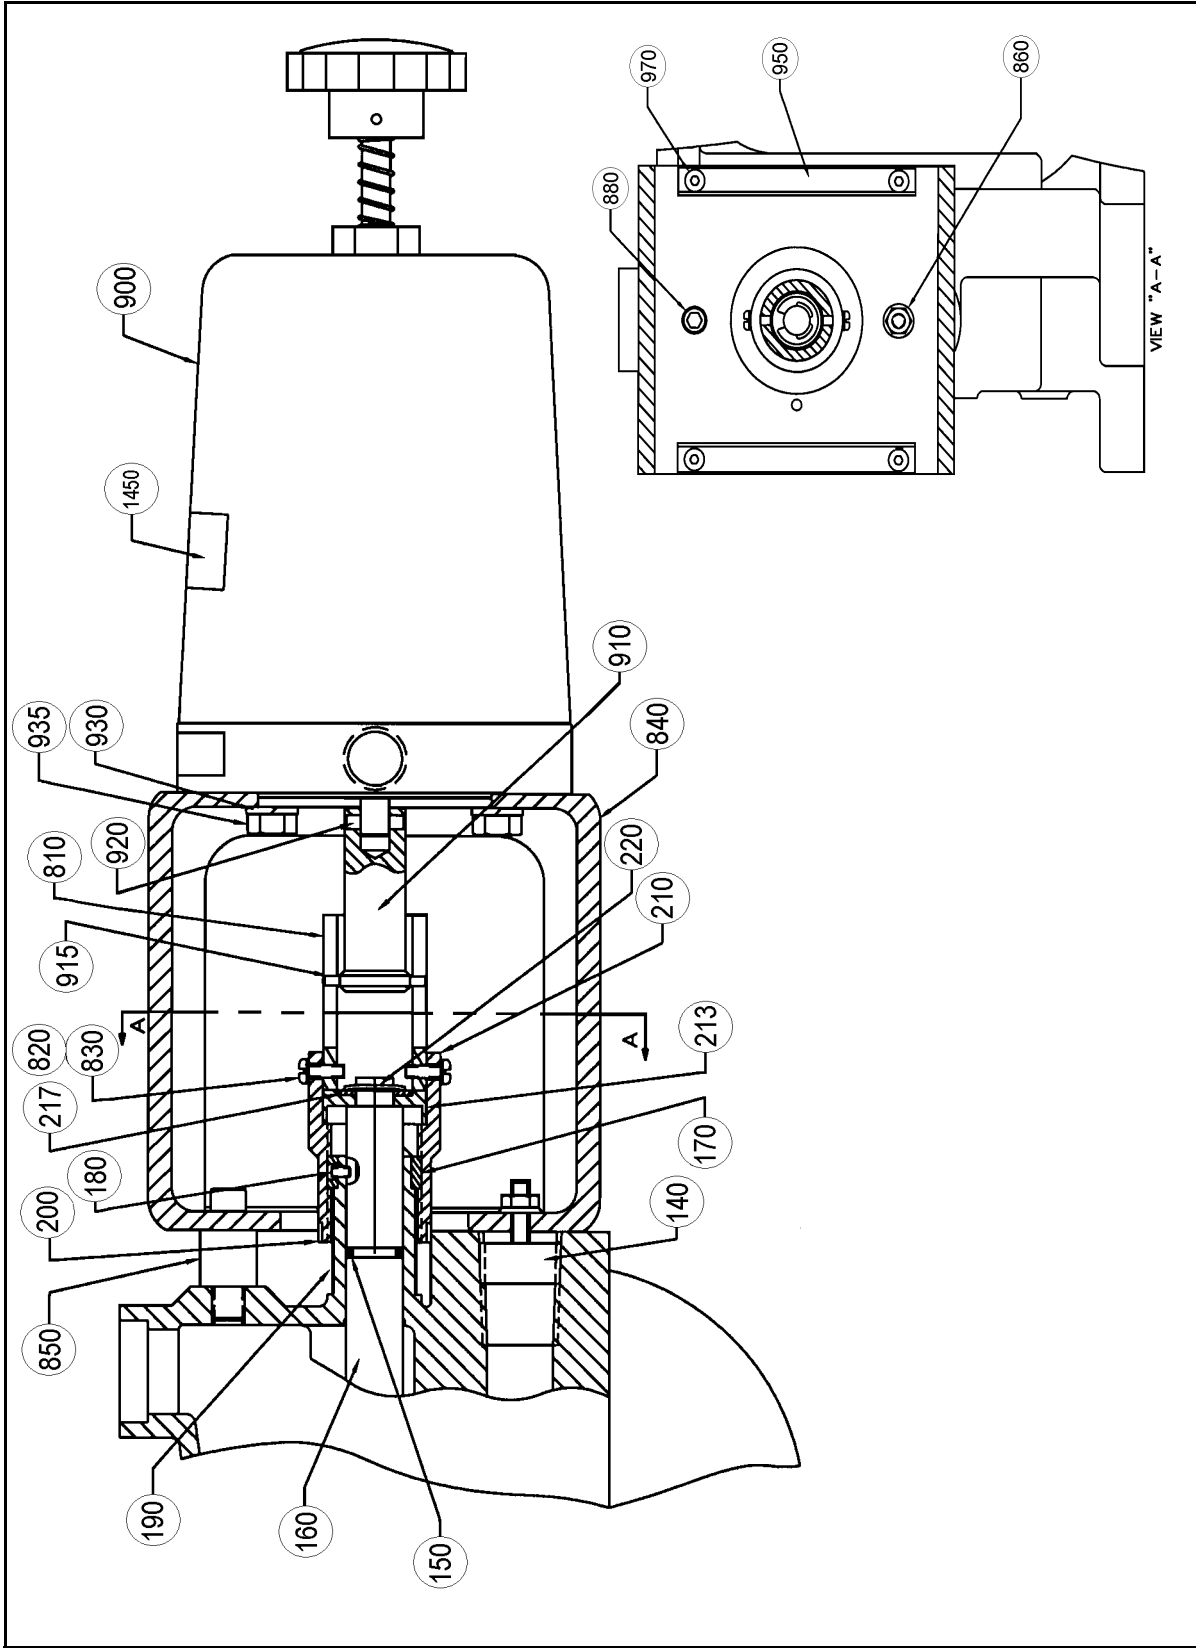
mRoy "B" ECC Mounting Adapter (DWG 10221460003).
